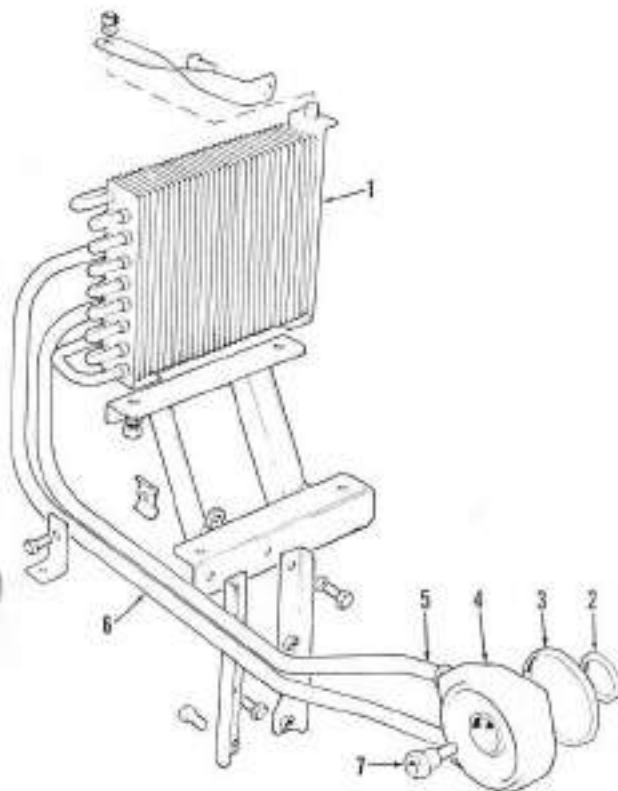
A—View showing engine oil cooler and mounting bracket arrangement used on 1410 and 1412 tractors with single hydraulic pump.
